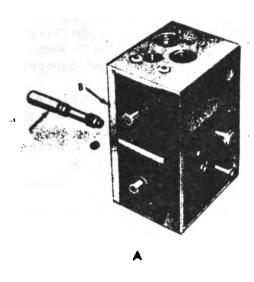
Gunner's hydraulic control valve disassembly or assembly (2 of 2).
